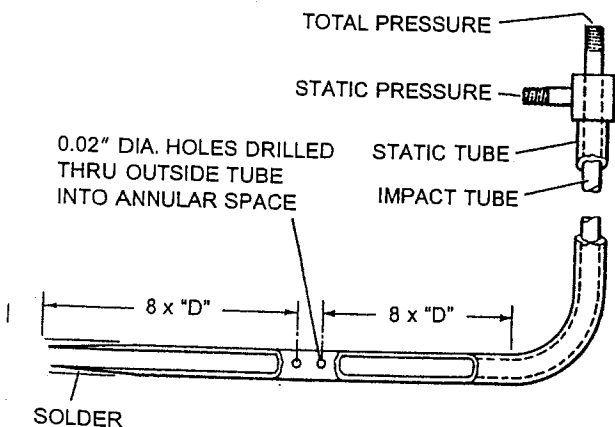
CONSTRUCTION OF PITOT TUBE
